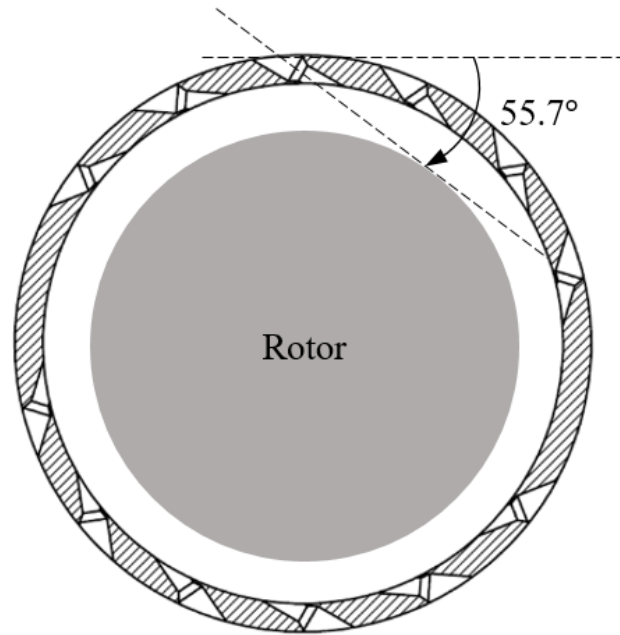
Drive Side (DS) view of the shaker assembly reprinted from [17].
